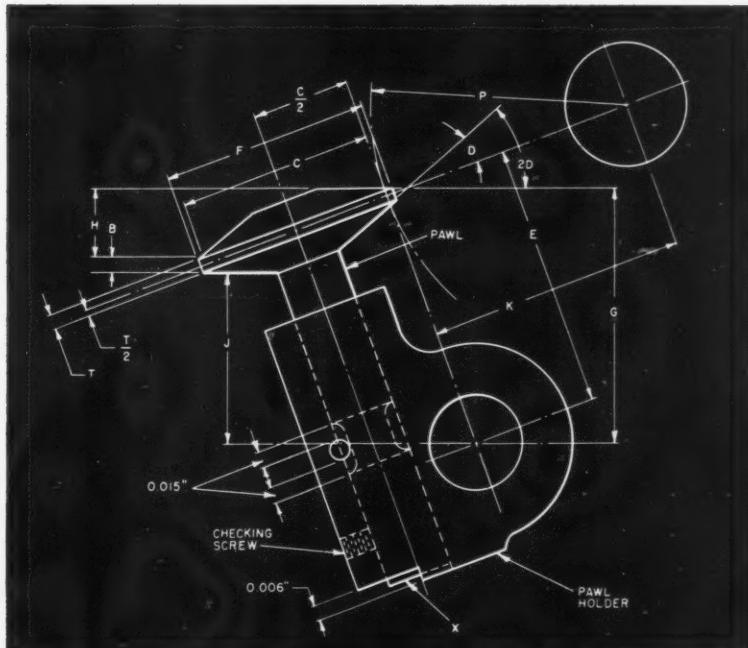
Flush-pin type of pawl locator. With the gear located radially and the pawl inserted in a tooth space, surface (X) on the pawl must lie within the step on the pawl-holder
